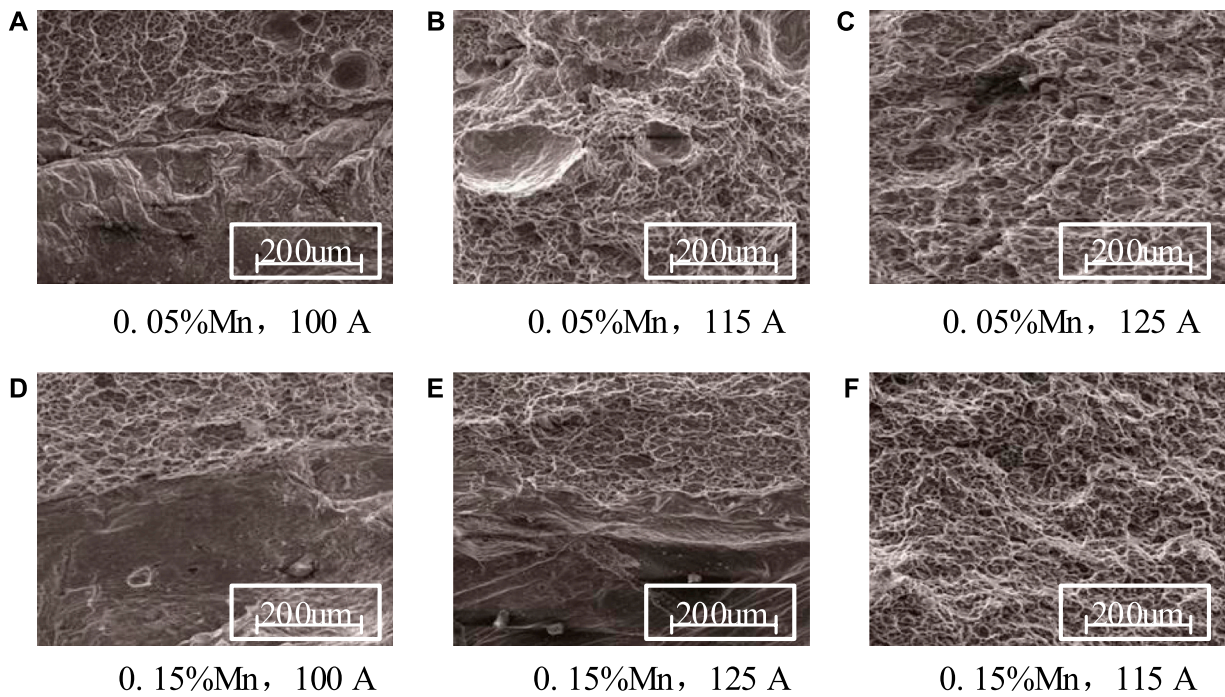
Fracture morphology of 7,005 aluminum alloy welded joint. (A) 0.05%Mn, 100 A. (B) 0.05%Mn, 115 A (C) 0.05%Mn, 125 A (D) 0.15%Mn, 100 A (E) 0.15%Mn, 125 A (F) 0.15%Mn, 115 A.
